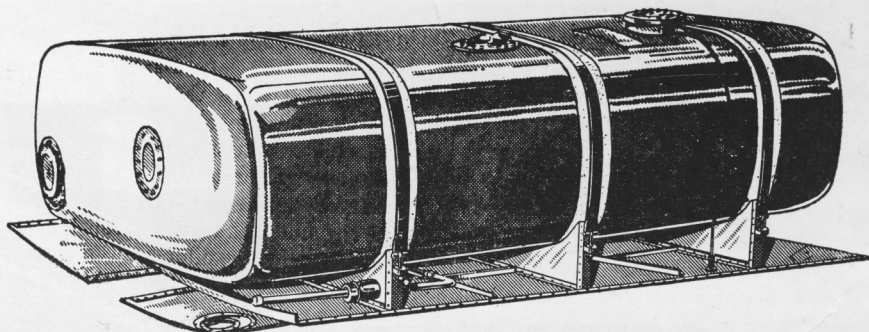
Welded aluminum fuel tanks have self-sealing covering to protect the plane from fire hazards.
